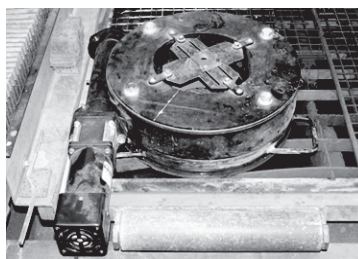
Device for rotating with sample under the AWJ cutting head
